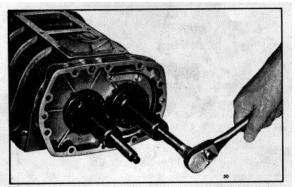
Removing Blower End Plate using Tool Set J 6270-F
